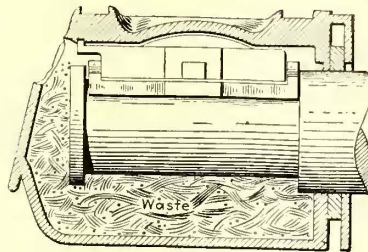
SKETCH OF JOURNAL BOX AND PACKING
